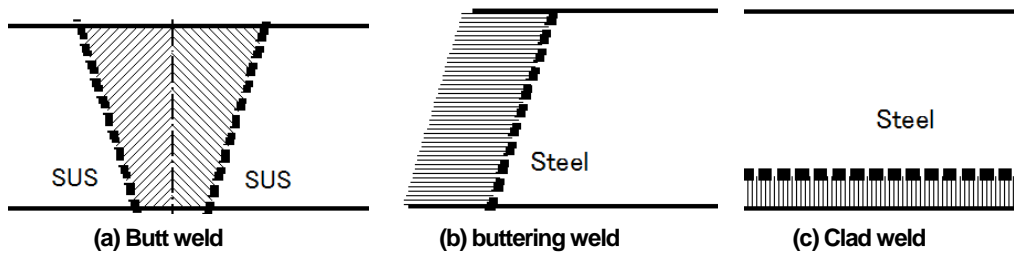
Weld parts constituting dissimilar metal weld joint.
